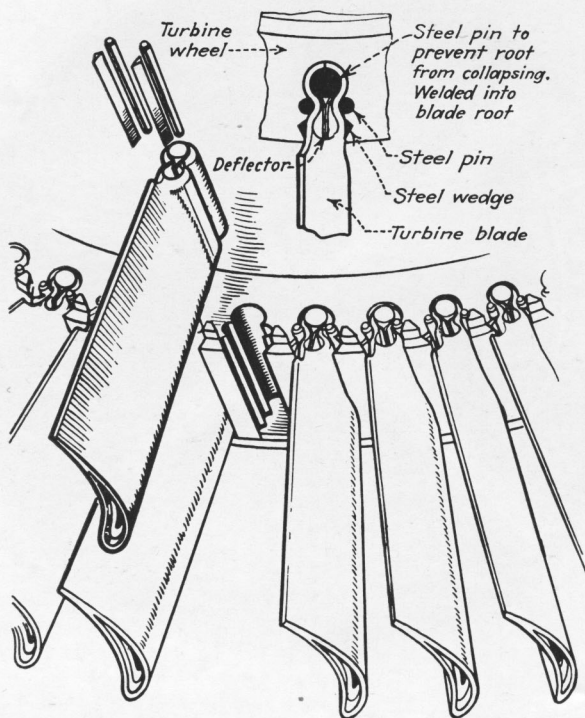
Method of attachment of hollow air-cooled blades to the turbine wheel.
